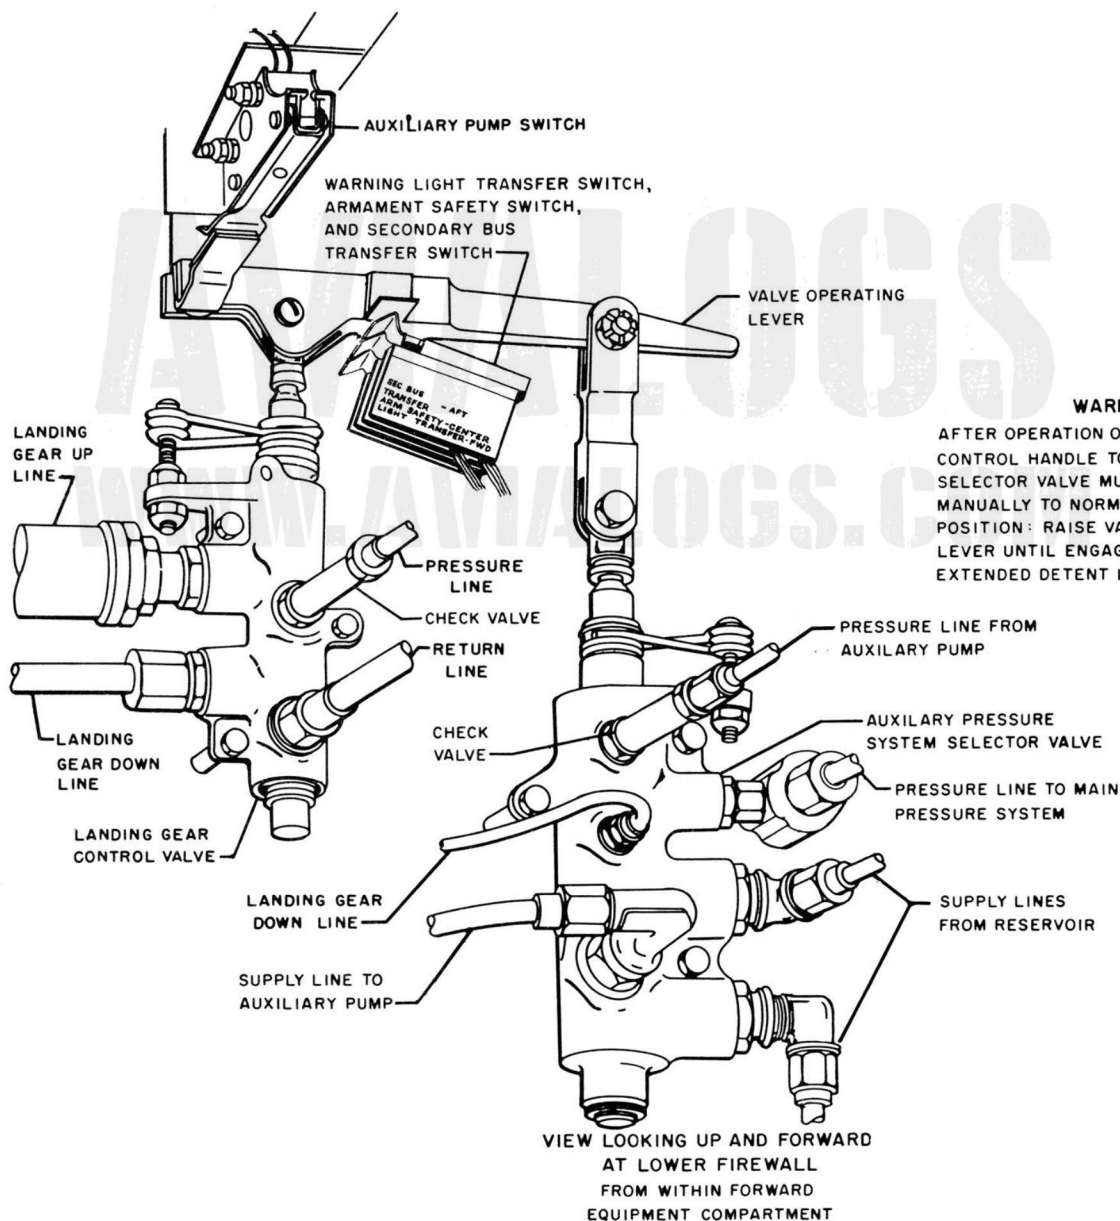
Landing Gear Control Valve and Auxiliary System Selector Valve Installation
